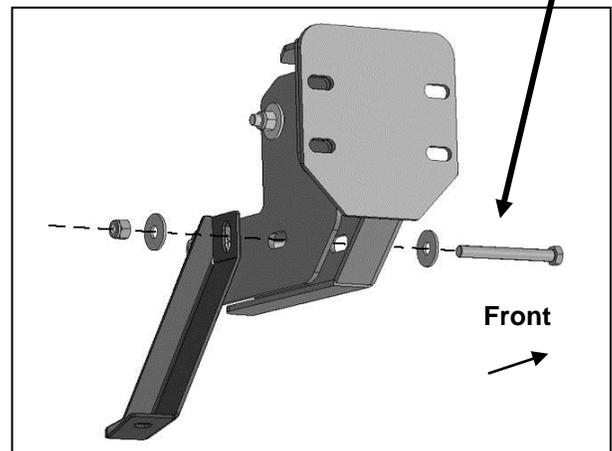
Attach driver/left Outer and Inner Frame Mounting Brackets to sides of frame. NOTE: Use Thick Spacer Washers on outer Mounting Bracket (arrows)
